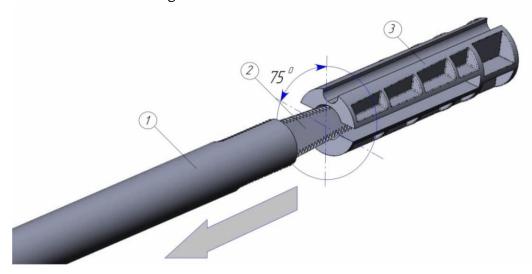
Locking stem design. 1- key, 2- wedge, 3-retainer.
